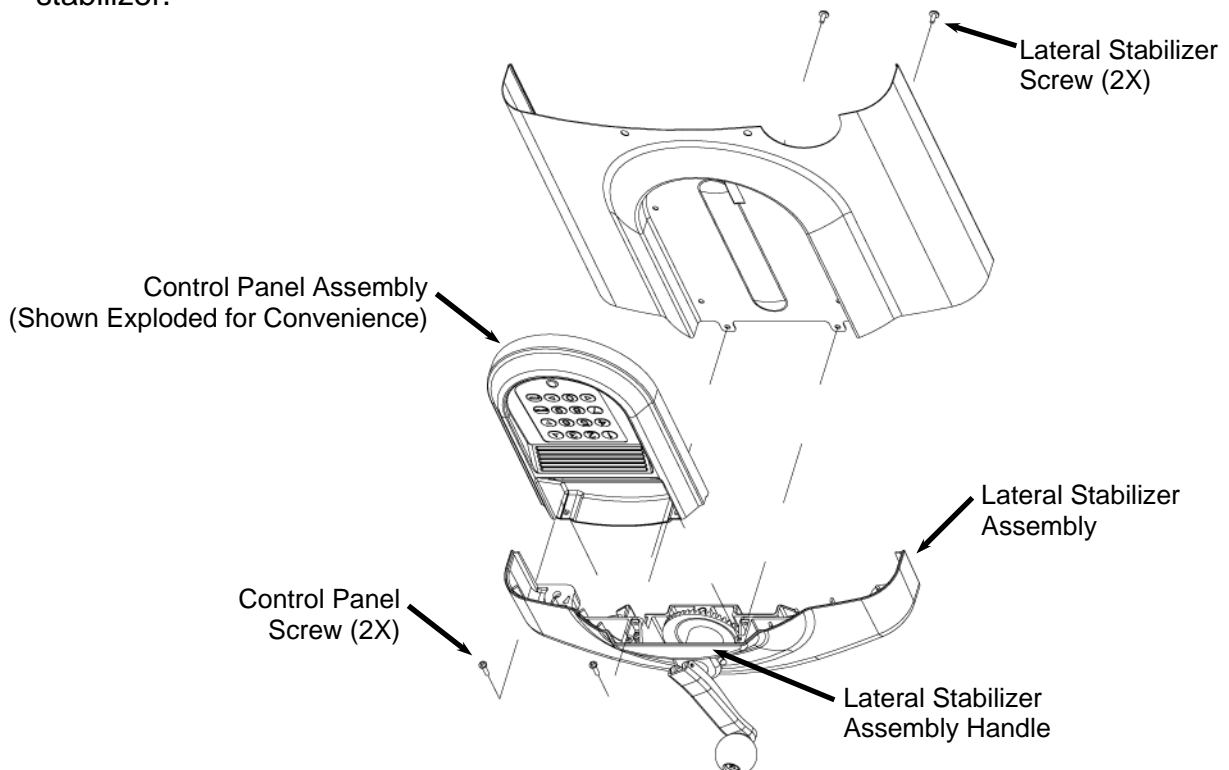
REMOVING THE LEFT LATERAL STABILIZER ASSEMBLY
